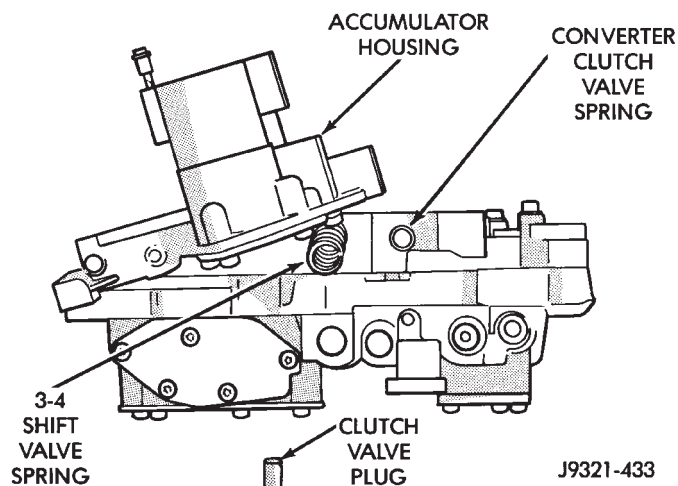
3-4 Shift And Converter Clutch Valve Springs And Plug
